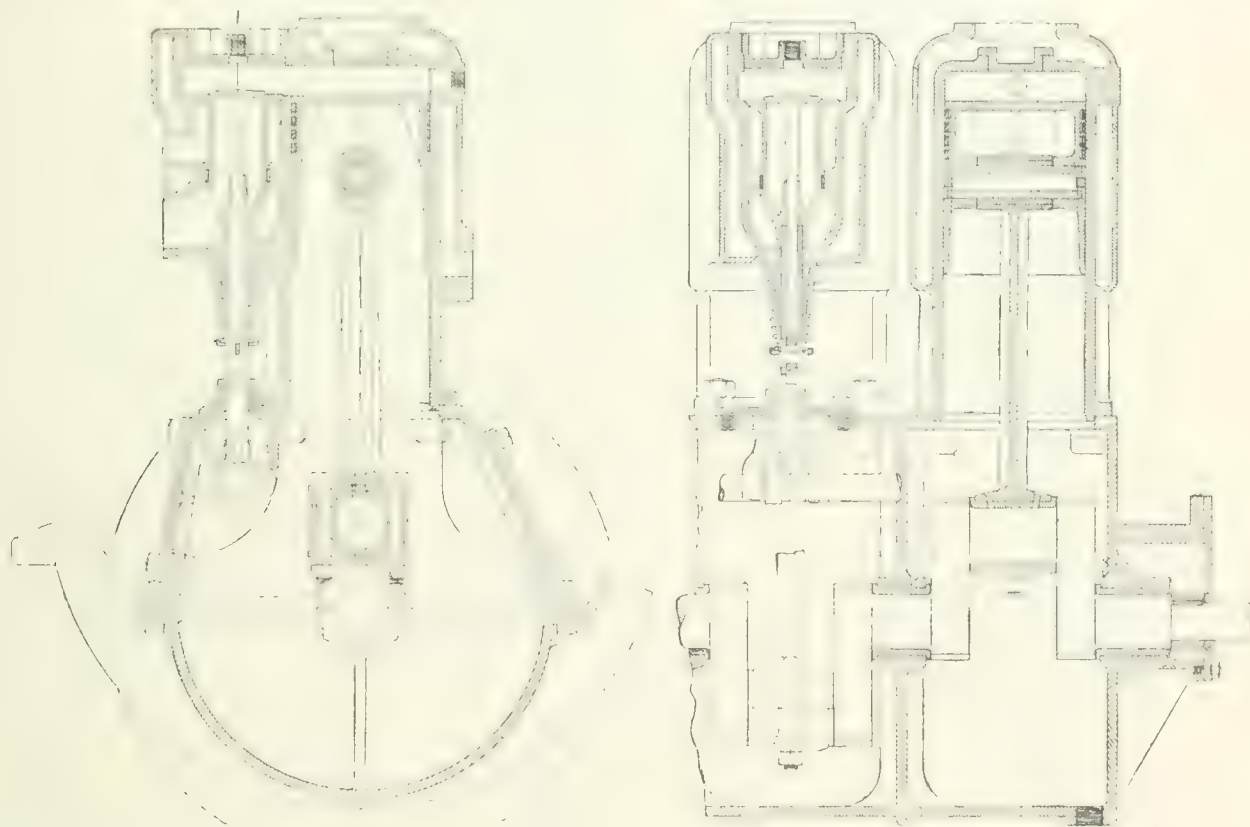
The Parsons Marine Motor. Section through cylinders and valves, showing patented combination arrangement of inlet and exhaust valve.
